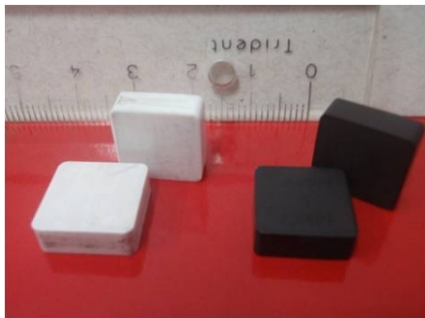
Ceramic cutting tool produced with alumina matrix composites
